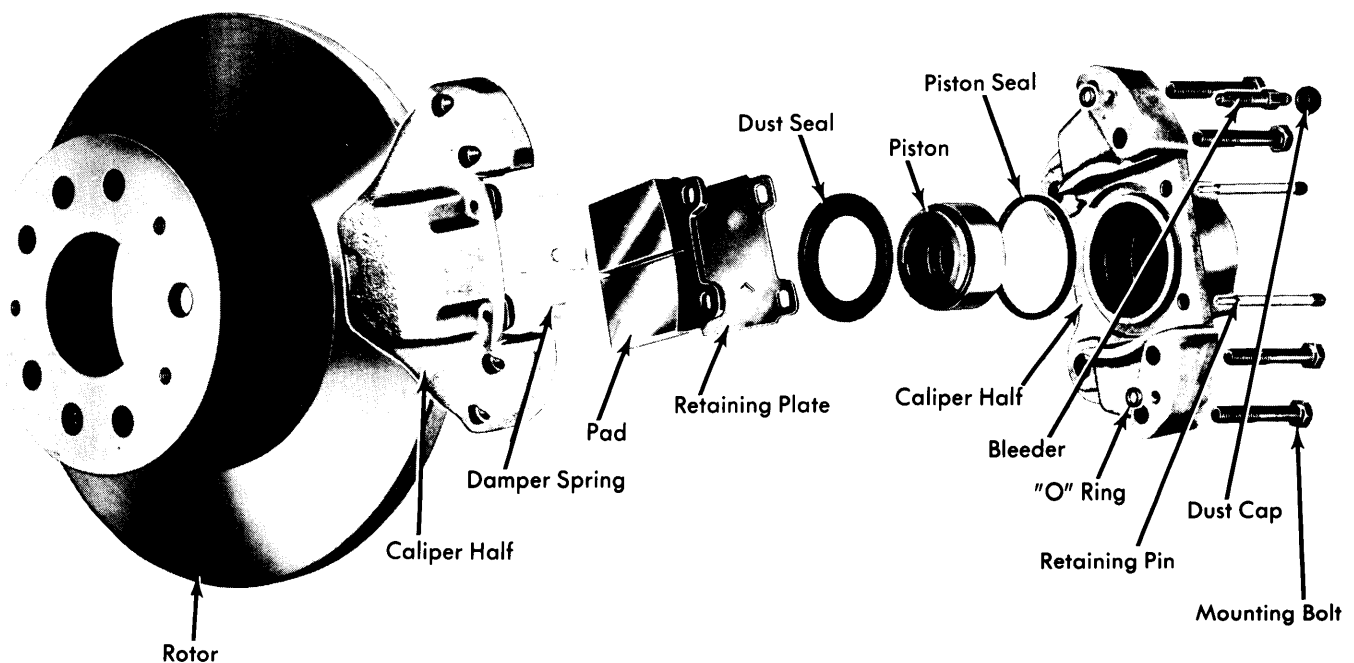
Volkswagen Type 2 ATE Front Disc Brake Assembly. Girling Caliper Internal Design is Only Slightly Different. Girling Has a Retainer Ring for Dust Seal that is not Integral with Seal.
